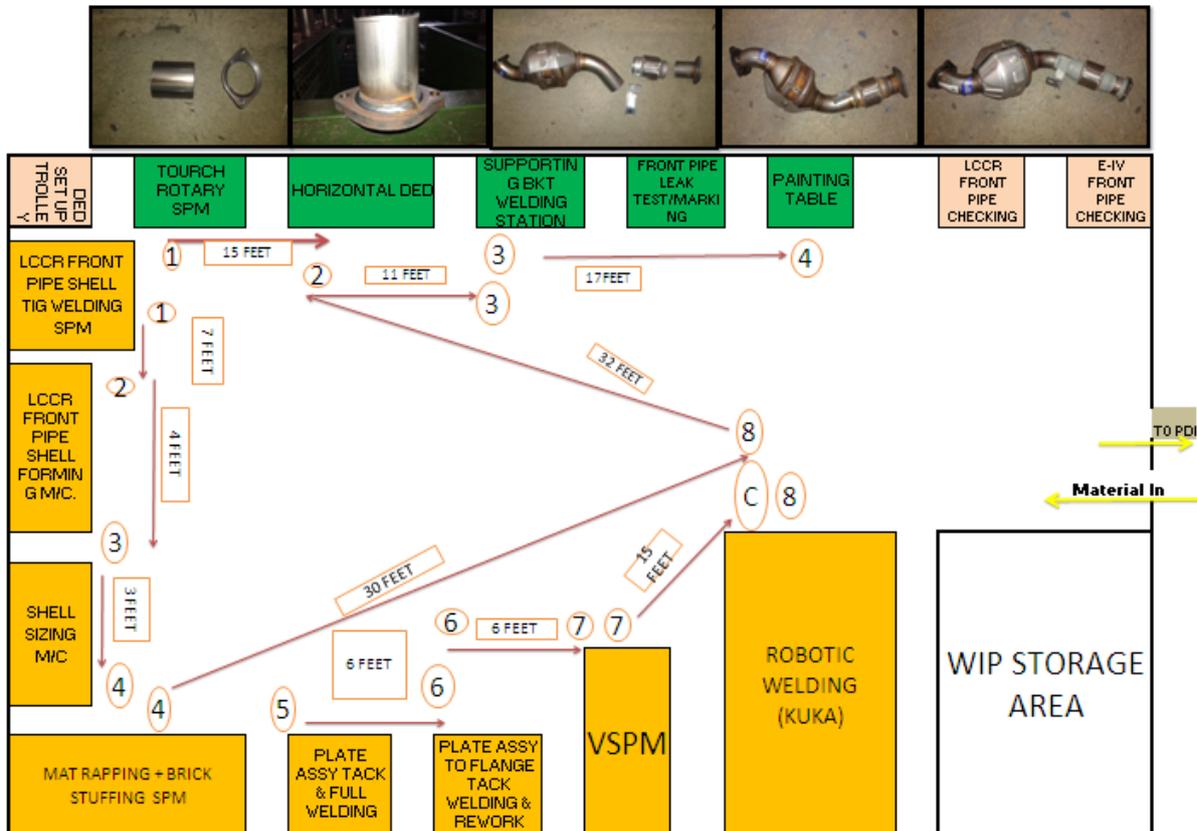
Scorpio W105 MHAWK Front Pipe Assembly Layout
